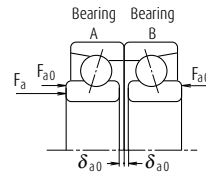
Back-to-Back Duplex Bearing Preload
